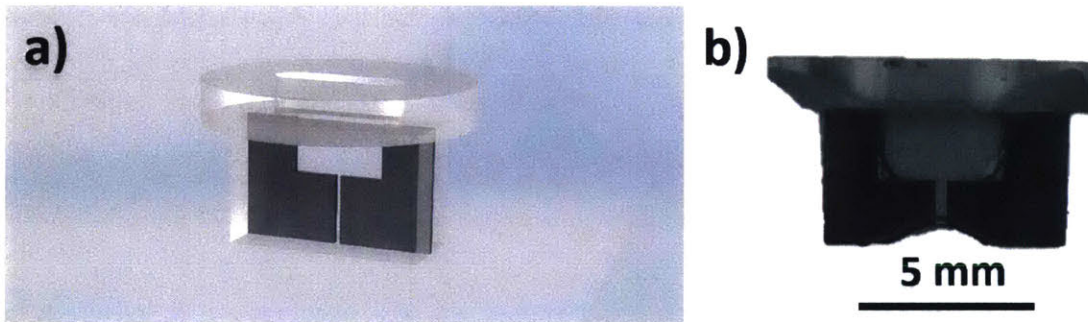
The 2D clear nozzle is composed of a two aluminum plates cut by wire EDM, sandwiched between two optically clear cast acrylic walls, and attached to an circular adapter to fit into the multi-piece ampoule. A 2D version of the cylindrical nozzle was a) first designed in CAD then b) fabricated and tested.
